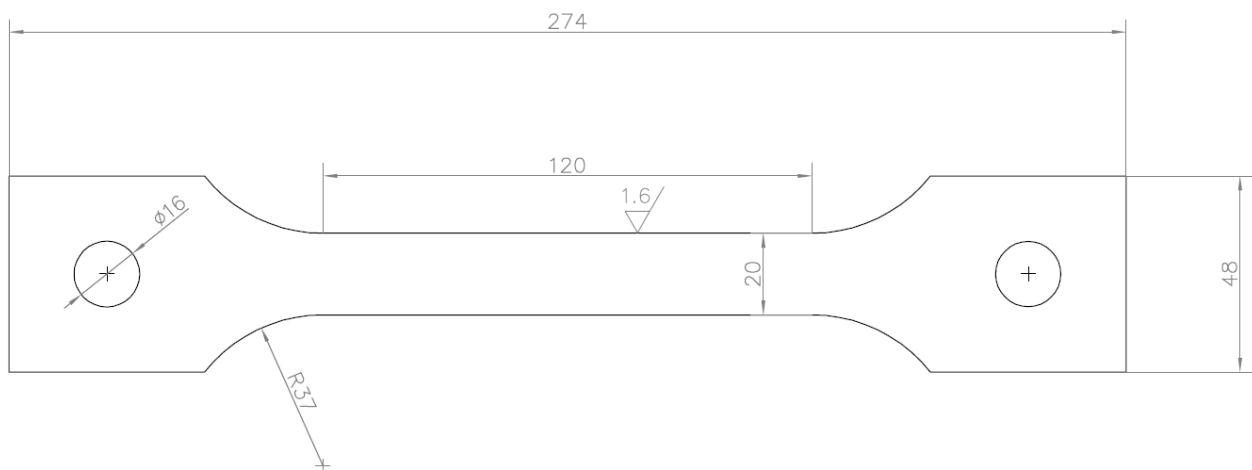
Test piece used in the short-term creep tests. Dimensions given in mm.
